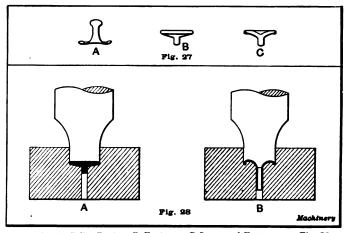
A. Collar Button; B. Fastener; C. Improved Fastener. Fig. 28. A. Die for Fastener, with Work in Place; B. Die intended to produce a Fastener of Improved Design, showing Piece actually produced.
